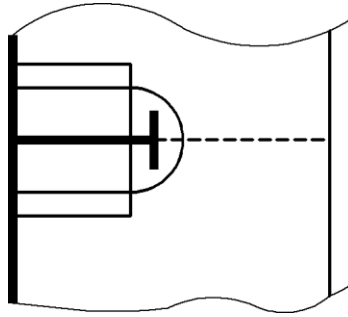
End connection of ordinary stiffener: Two large collar plates
